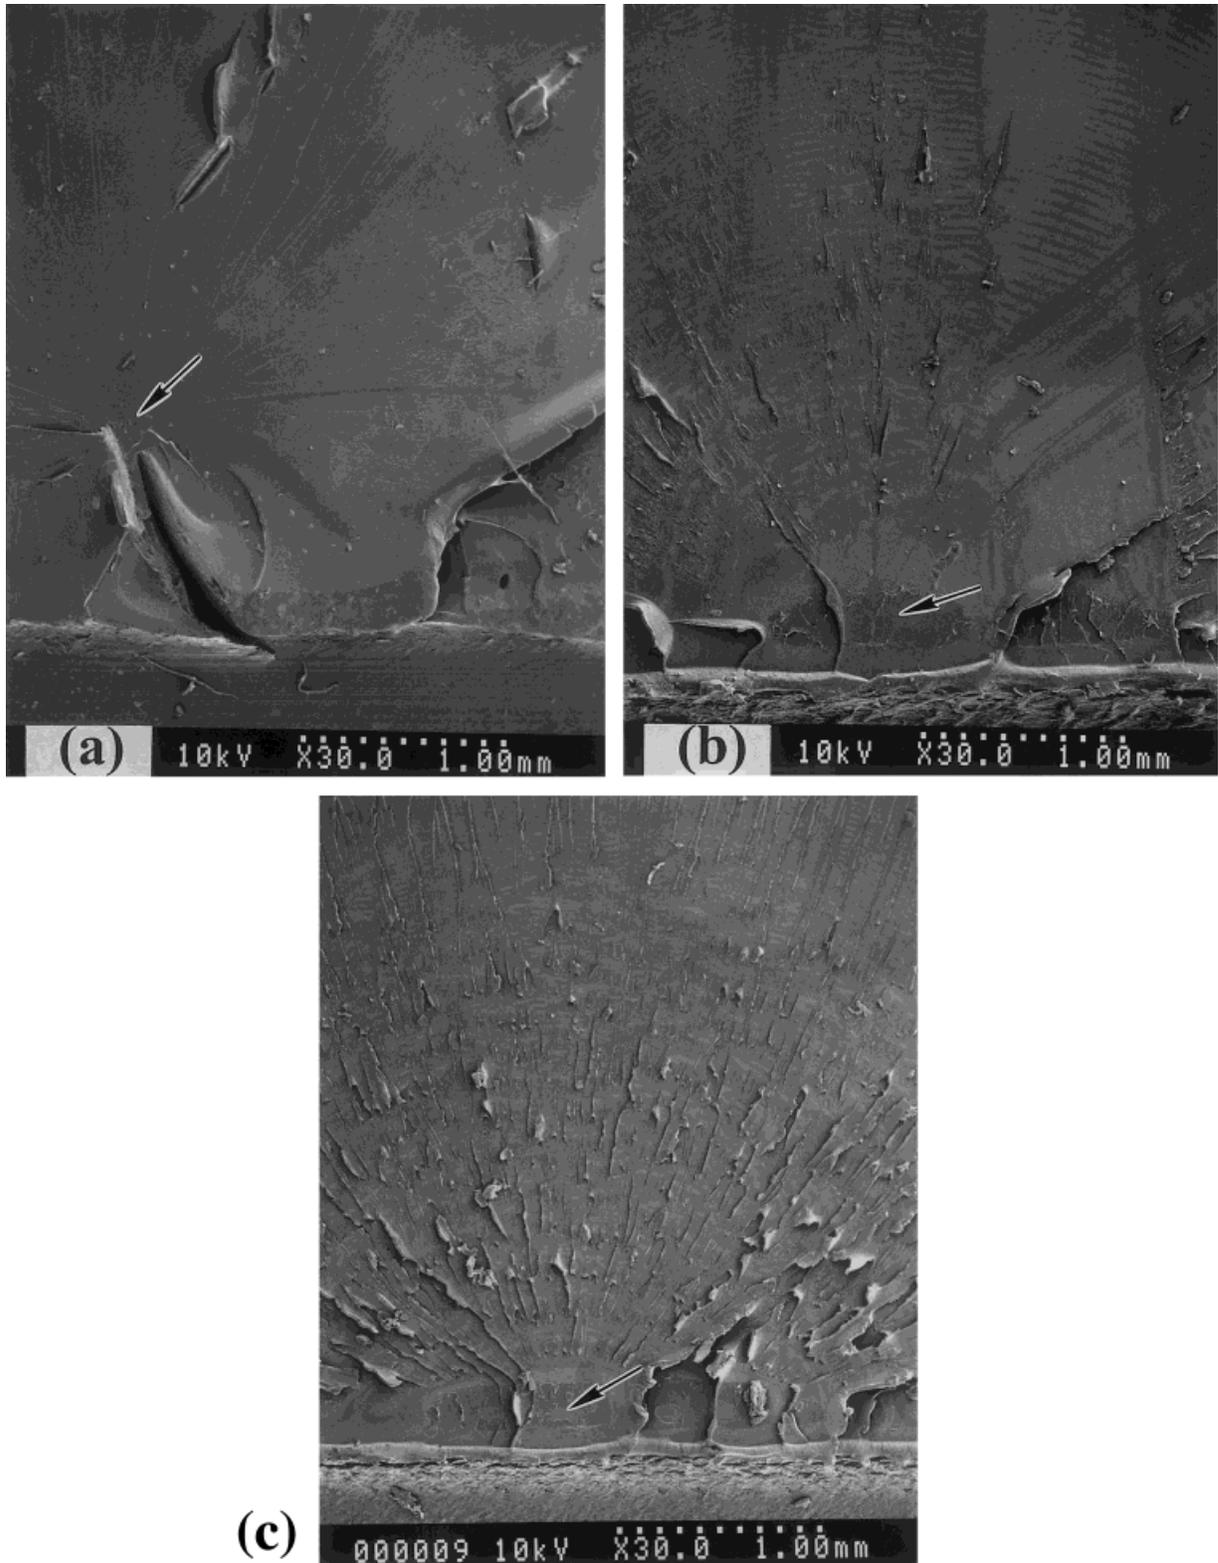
Fracture surfaces of the specimens impact-tested at room temperature: (a) pure PC, (b) PC-1.04 phr, (c) PC-3.56 phr. The arrow end represents the nucleation point of craze.
